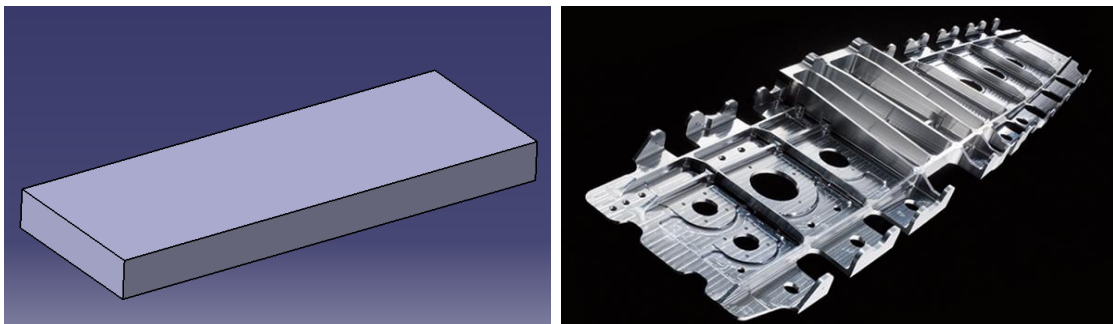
Conventional machining method for wing ribs a) Aluminium billet, b) machined wing rib (CHIRON, 2012)
